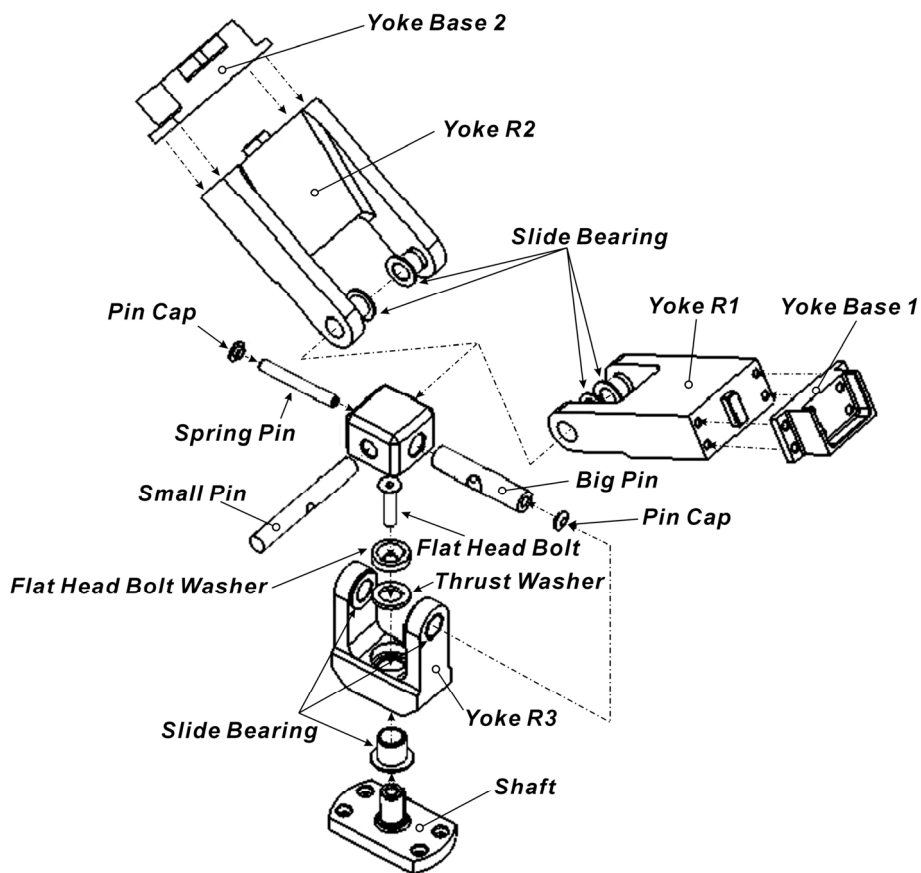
Exploded view of lower 3-DOF passive joint.
